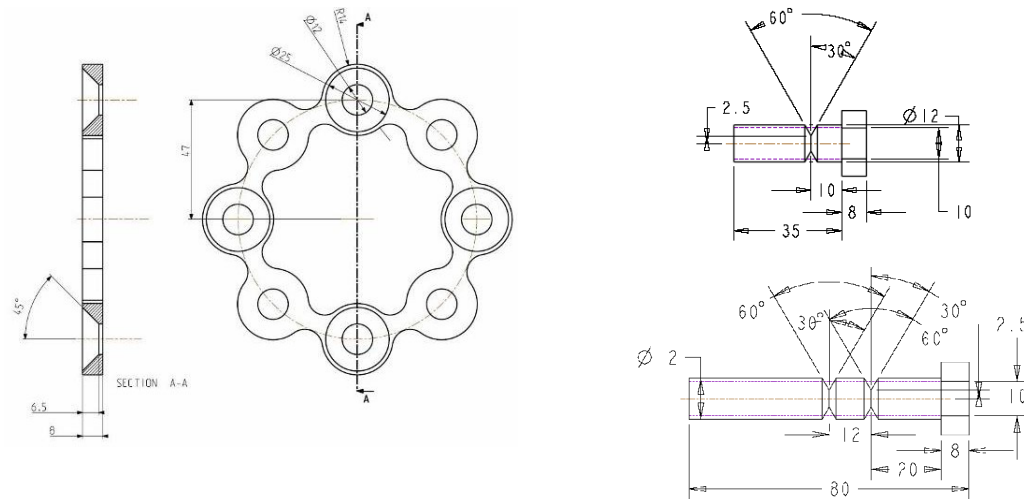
Technical drawing of breakable ring and single and double cut screws.
